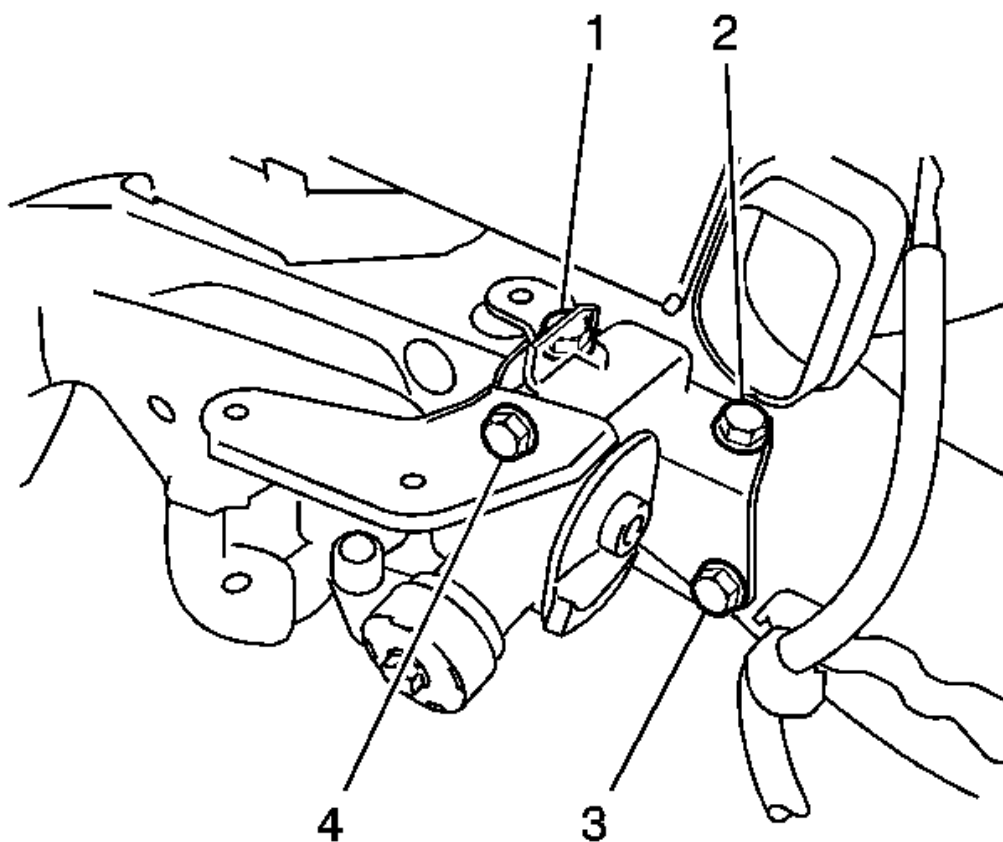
Identifying Left Side Engine Mounting Insulator Bolts
